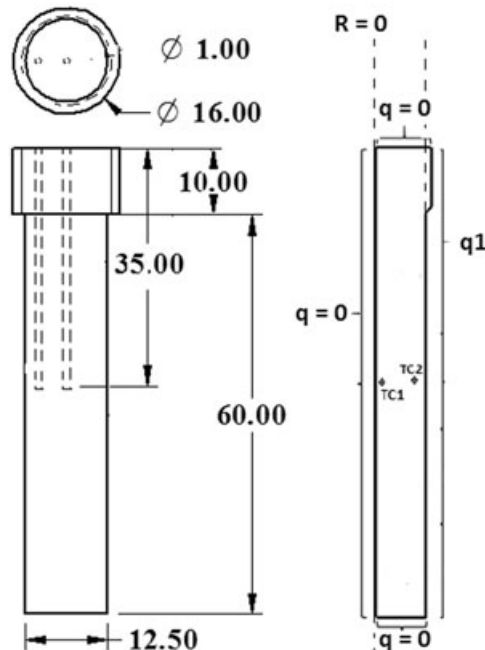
Schematic sketch of probe used in hot-cold probe technique
